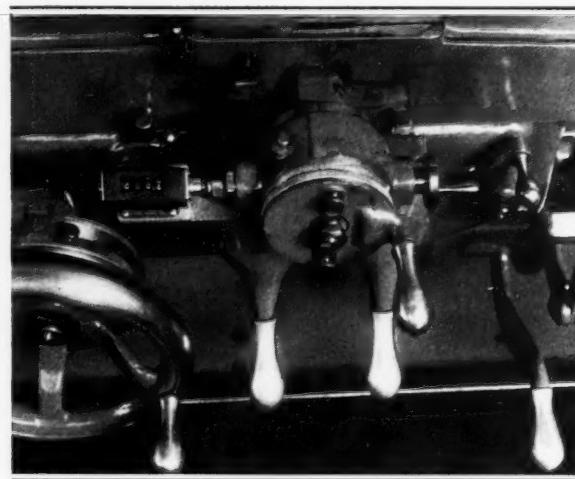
Lodge & Shipley Direct-reading Diameter Attachment
